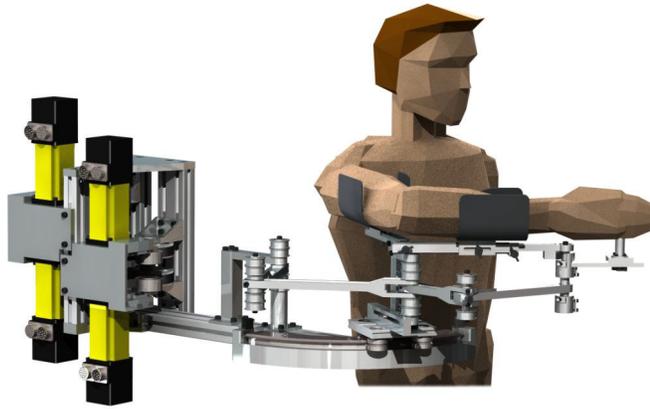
A CAD drawing of the Planar MEDARM. The 3DOF mechanism is entirely underneath the user's arm. The cable-drive system allows the motors to be located behind the user (cables not shown).
